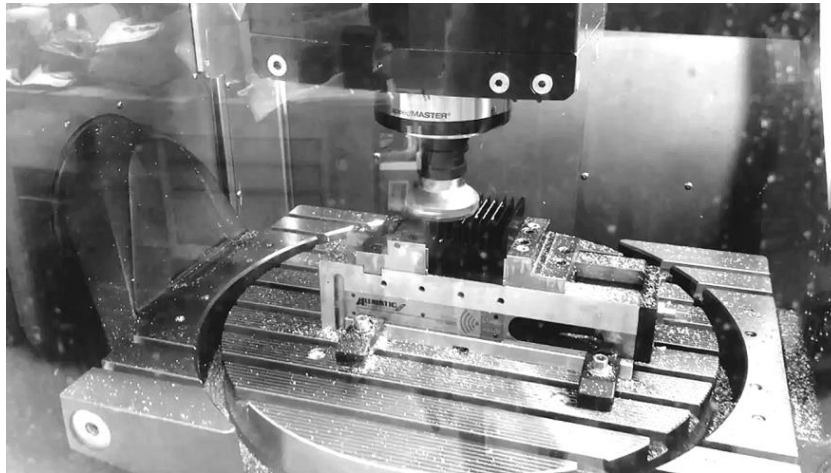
Experimental setup for the sample manufacturing process, work-piece arrangement and the tool cutting through the test work-piece
